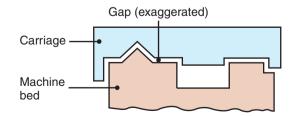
Cross-section of a machine-tool slideway. The width, depth, angles, and other dimensions all must be produced and measured accurately for the machine tool to function as designed.
